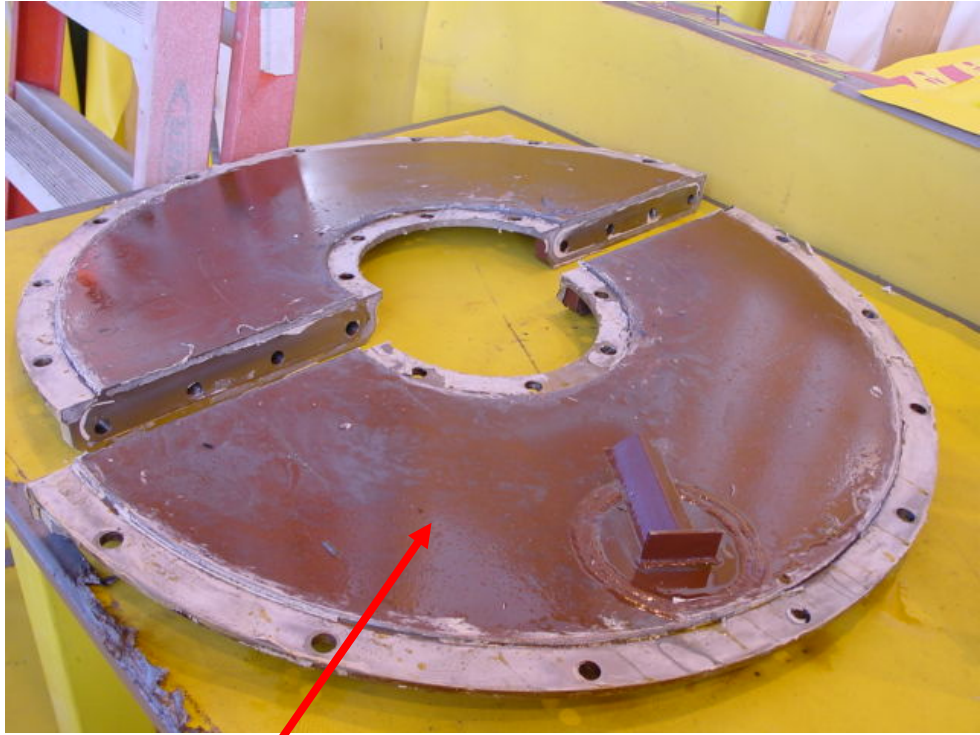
Photograph of the Oil Cooler Penetration Flange Area
